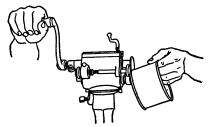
Burring Edge on Bottom of Pail, Showing Correct Position of the Hands.
